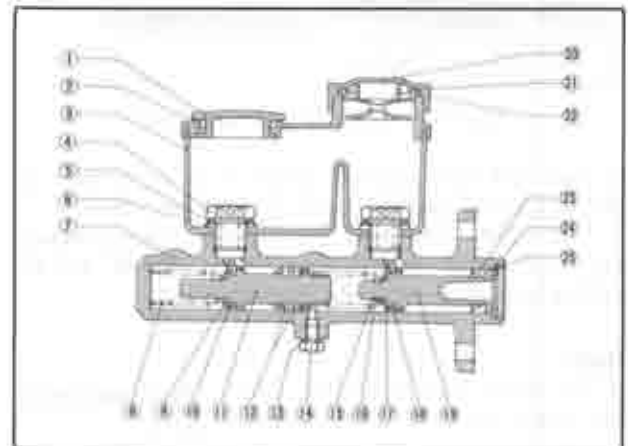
Dual master cylinder cross section (Right hand drive vehicles)
